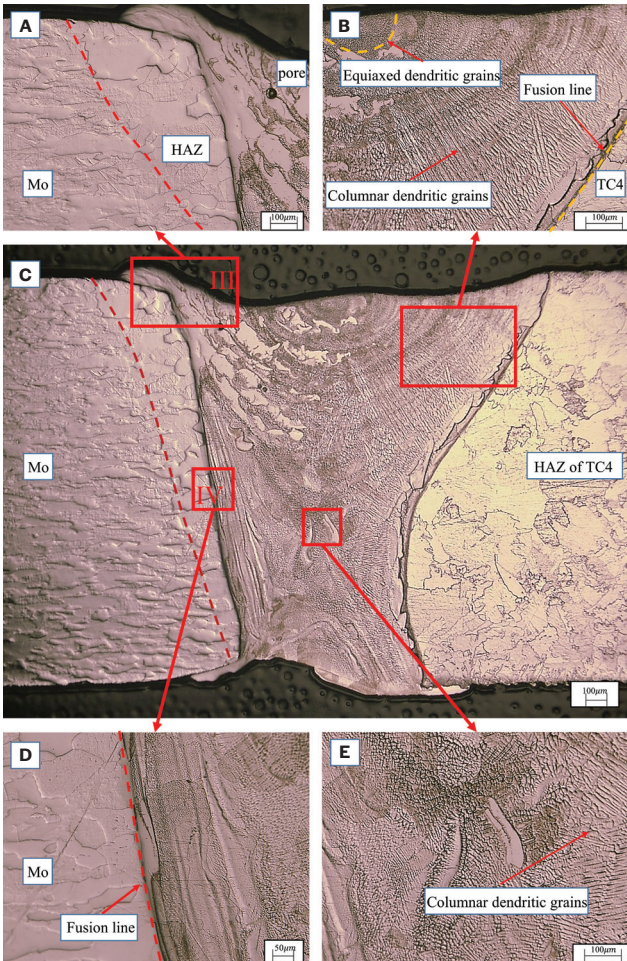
Cross-section morphology of the joint with beam oscillation: A – Mo side; B – TC4 side; C – total morphology; D – lower Mo side; E – lower weld zone.
